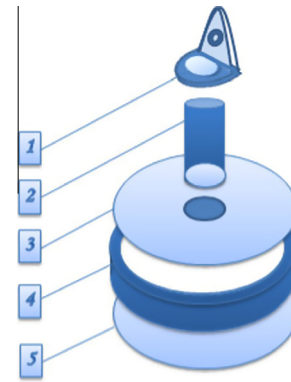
Stirling engine (Heating Cylinder components) design. 1. Elbow Joint, 2. Power Cylinder, 3. Top Plate, 4. Heating Cylinder, 5. Lower Plate.
